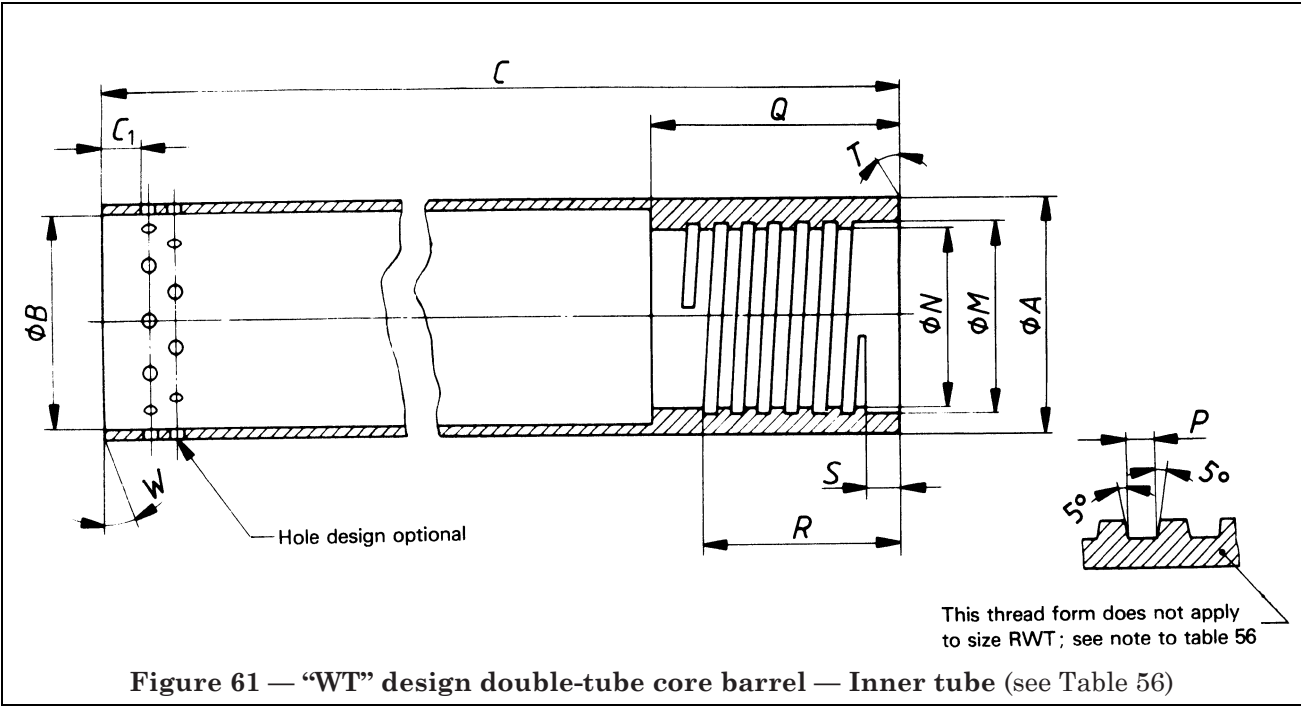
“WT” design double-tube core barrel — Inner tube (see Table 56)
